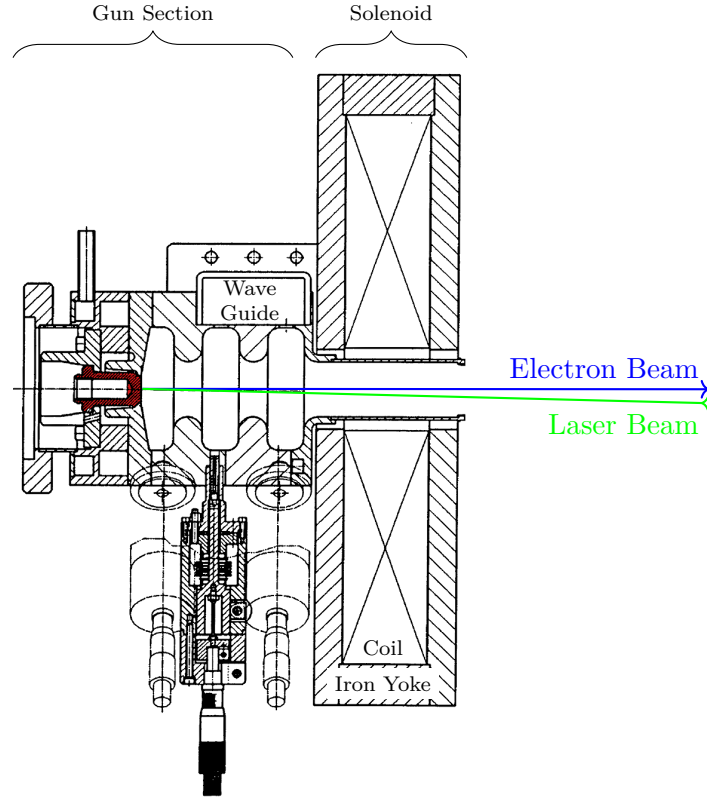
Cross section drawing of the electron gun together with the solenoid (which is used for focusing the electron beam) showing the photo-cathode (red) and the electron and laser beam trajectories (modified version from [Bos+96] and [Bos+95])
